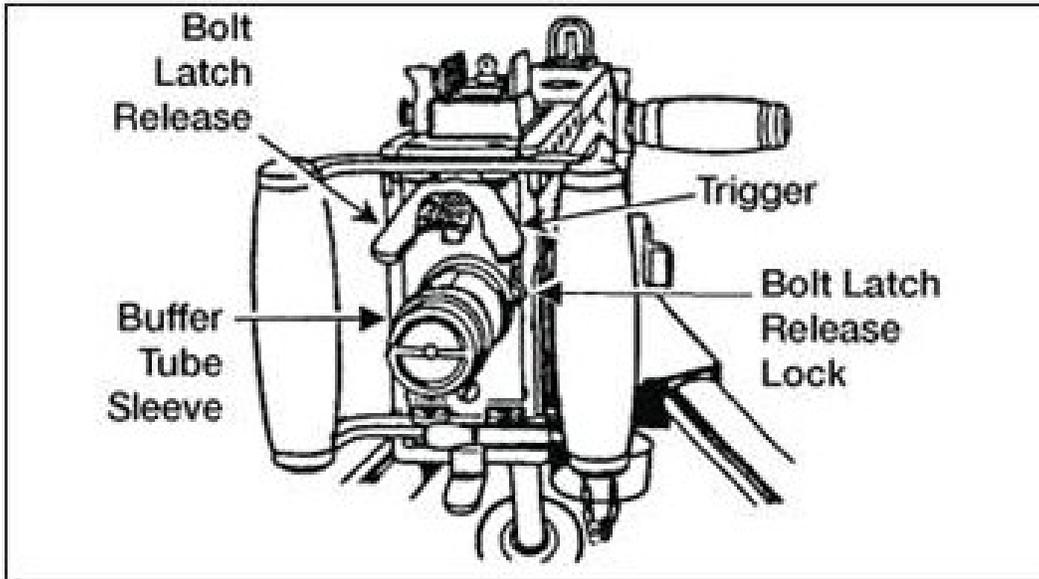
ST-1025_03 (Releasing the bolt latch)
